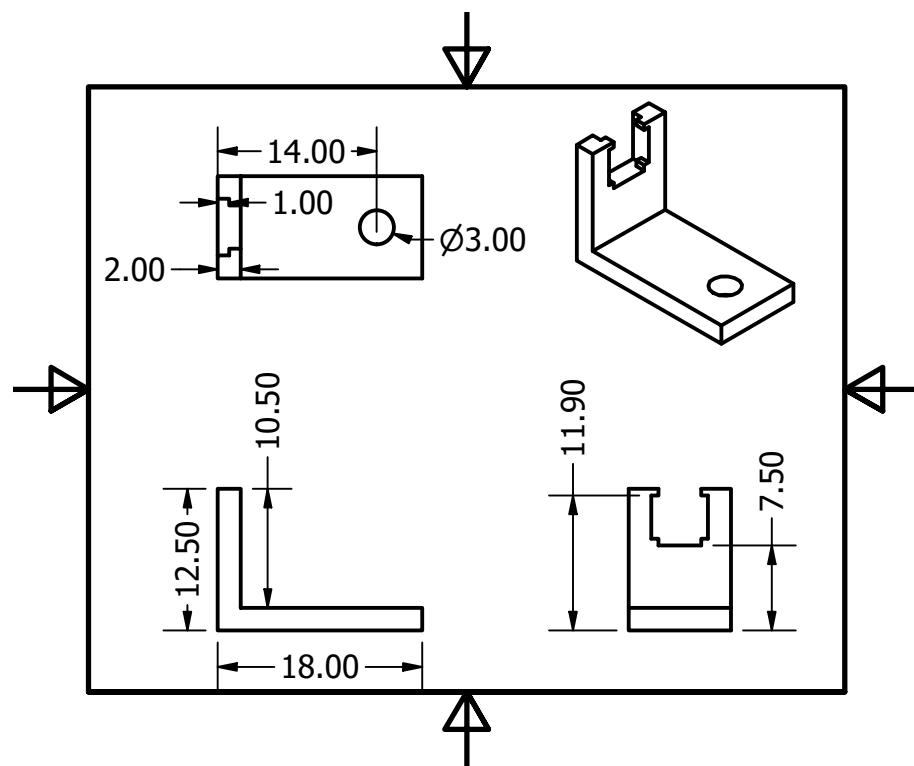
The drawing of trap holder. All the dimensions in this image are with mm unit.
